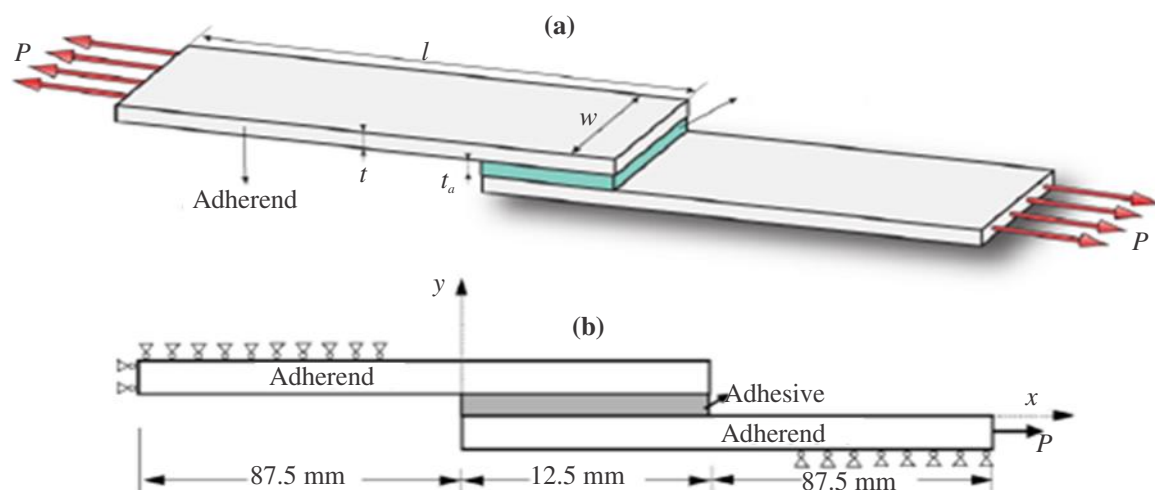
Typical test specimen dimensions. (a) Three dimensional single lap joint, (b) Boundary
